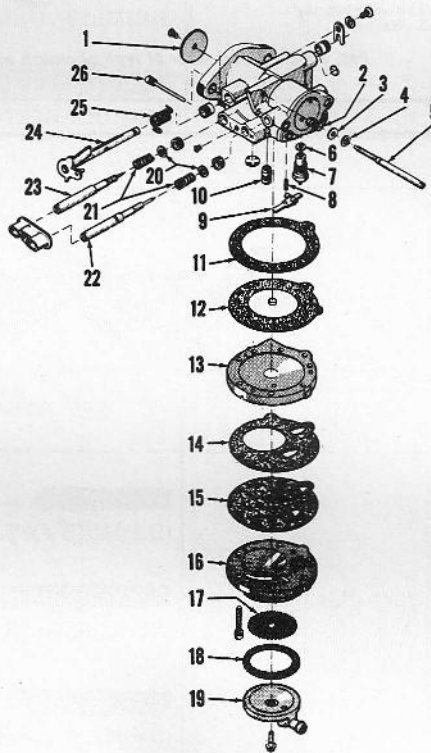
Exploded view of Tillotson HL model carburetor used on 450, 550 and NU17 models.
